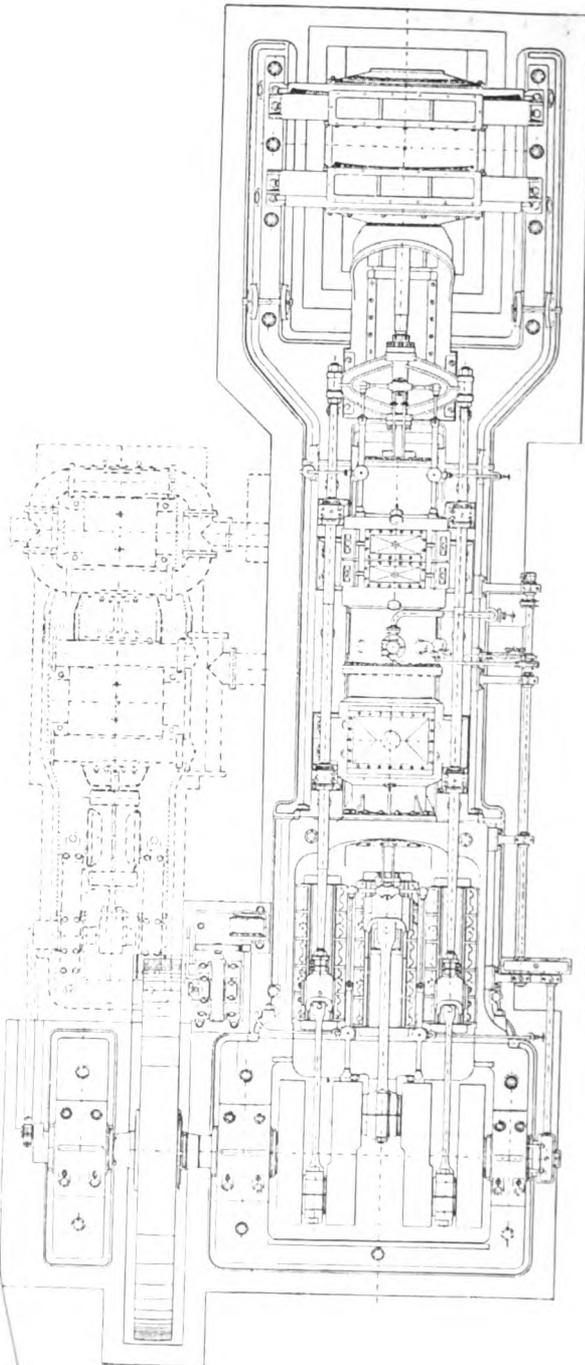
Plan, Oechelhäuser Engine, with Blowing Cylinder.
